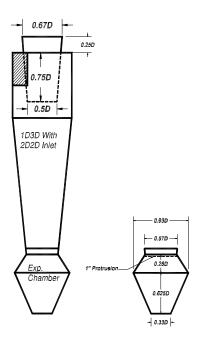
Modified 1D3D with tapered outlet and expansion chamber showing relative dimensions with regards to the diameter of the body of the cyclone.
